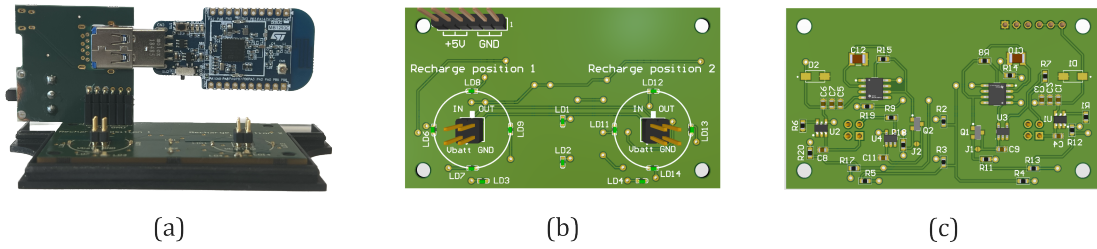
Recharging station designed for the tested device. (a) Designed PCB connected to USB-Dongle MB1293. (b) PCB top view. (c) PCB bottom view.
